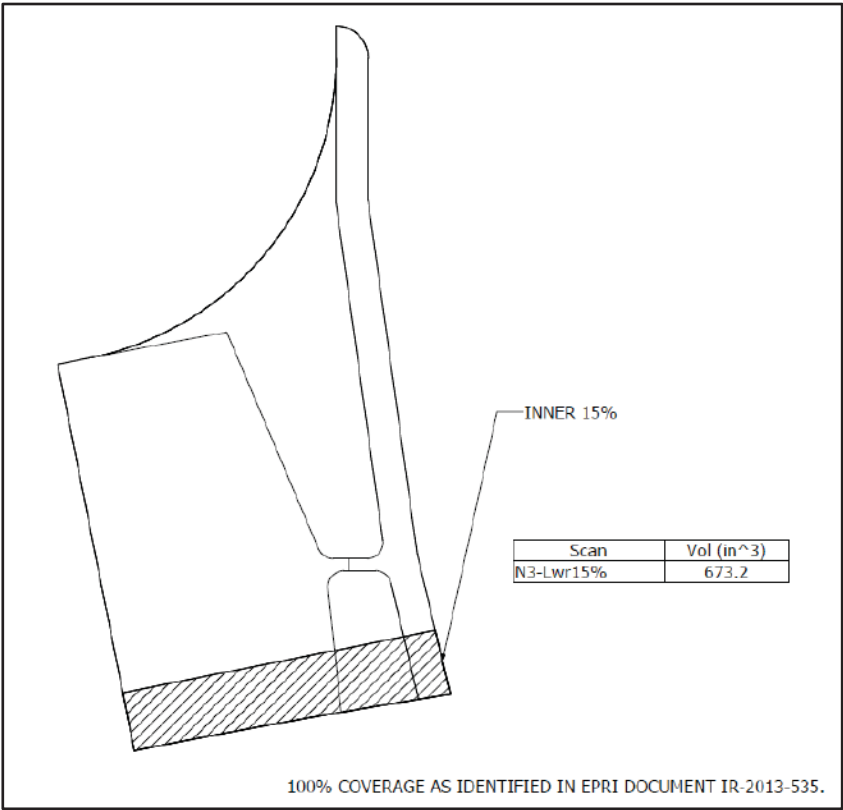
Weld N3D-NV, Achievable Inner 15% Tangential Coverage
